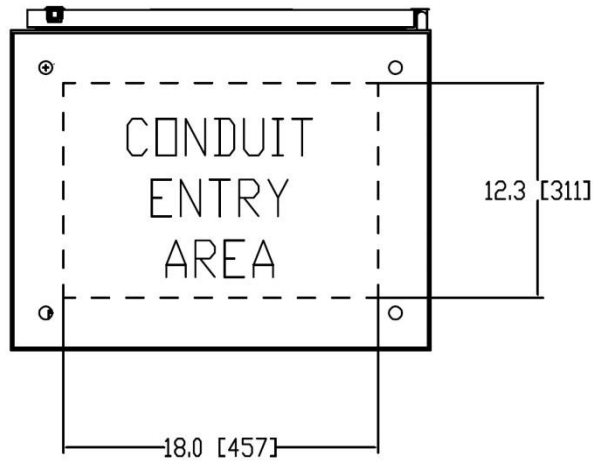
Top Dimensions, no Customer I/O Panel (Enclosed)
